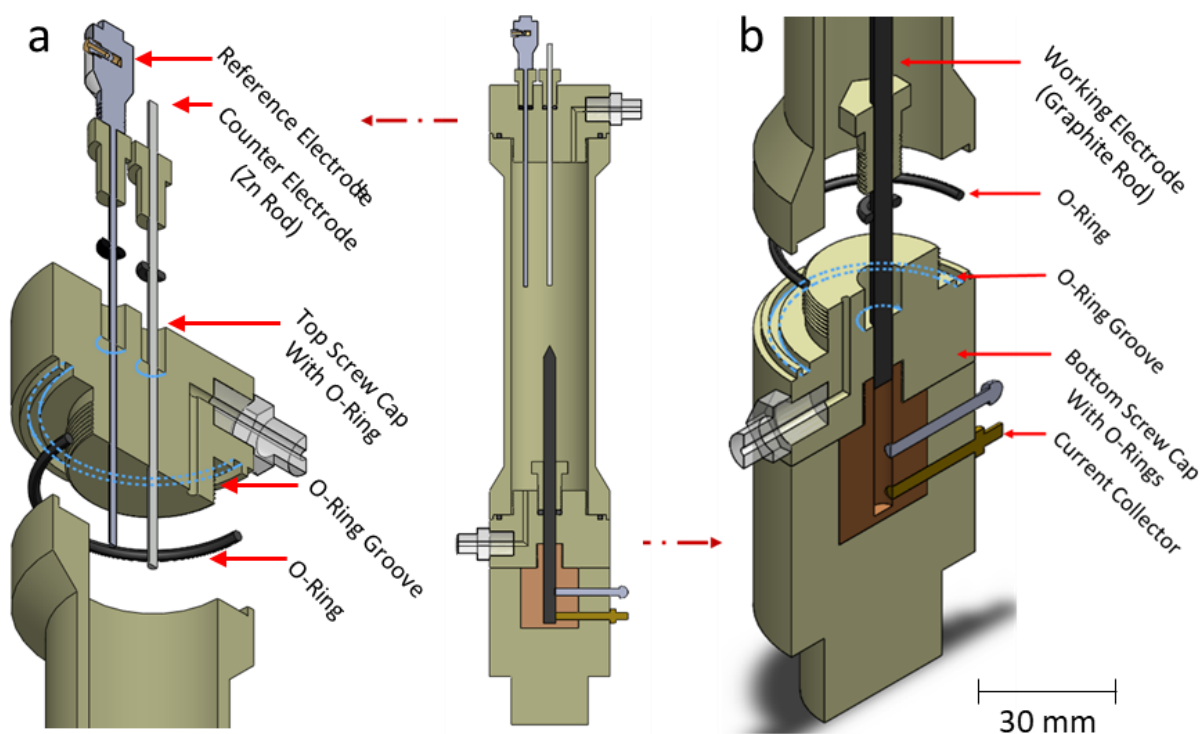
Exploded view of the cell a) top cap and b) bottom holder with their essential components of the in-situ cell
